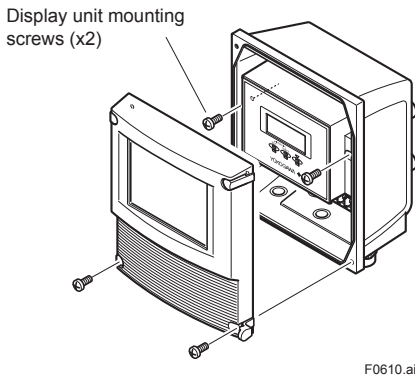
Removing the Front Cover and Mounting Screws of Display Unit for AXFA11 Remote Converter
